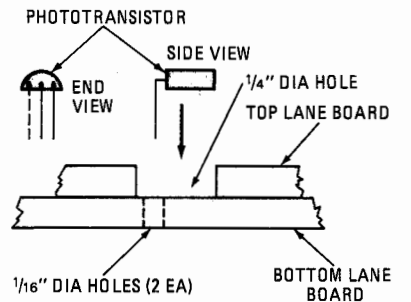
HOW PHOTOTRANSISTORS are mounted. Be careful when bending pins.
